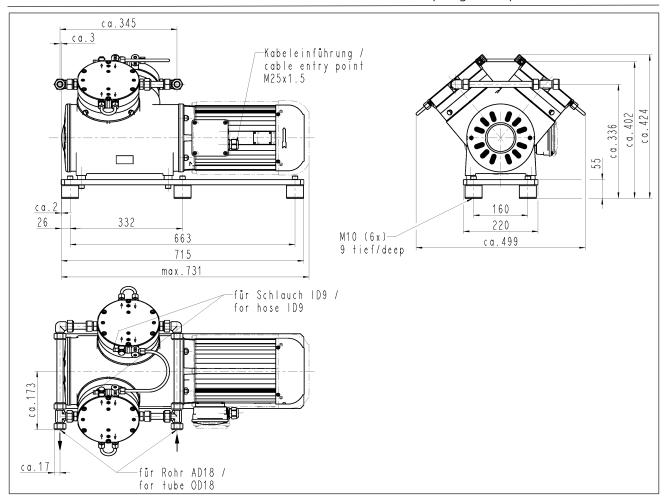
Mounting dimensions pump series N1400.1.2.12
